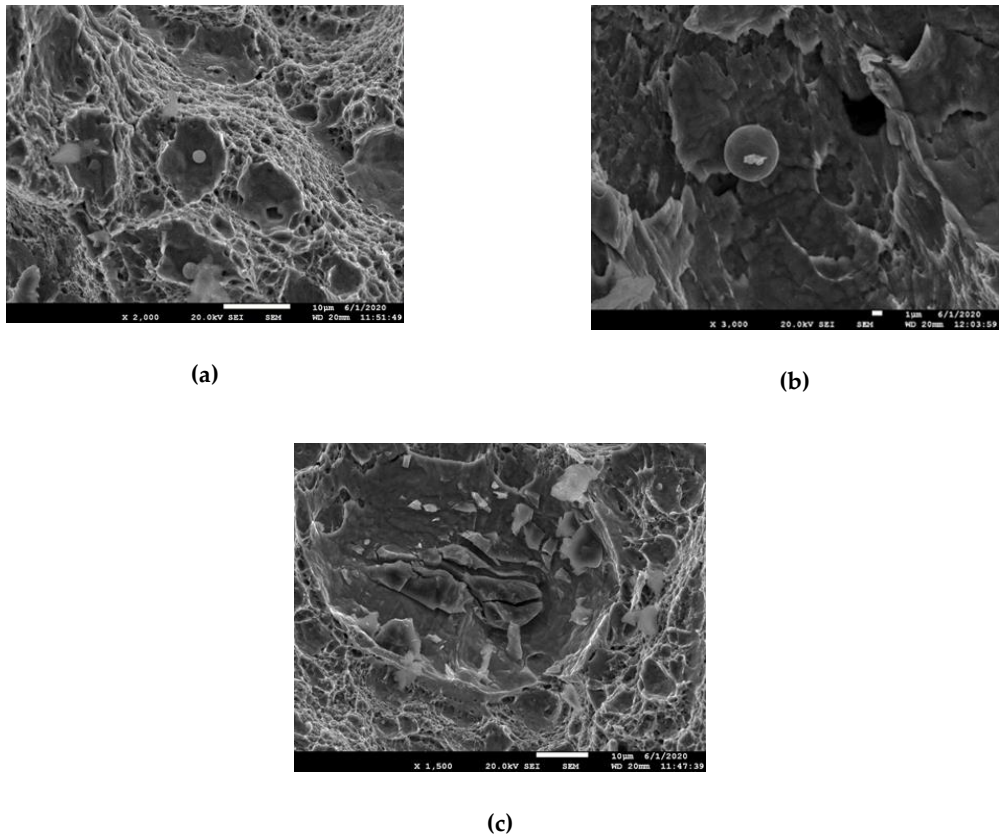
Fractured surface images of the chessboard family 2 (Samples 13-15)
